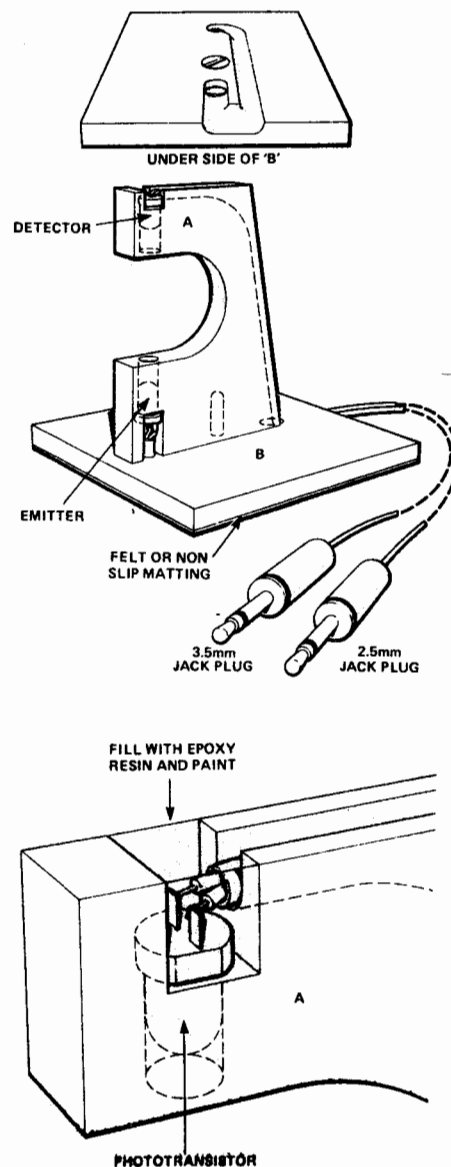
Constructional details of our sensor. Using different sized jack plugs will prevent incorrect connection.
